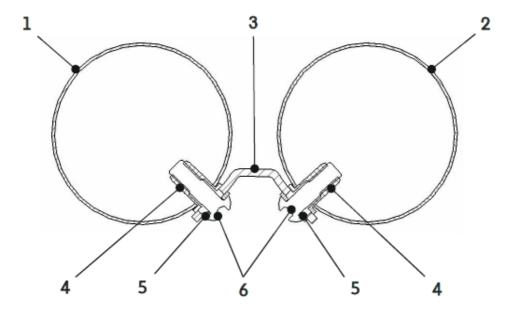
Example of attachment of the tubes in the front and rear (section A-A)
